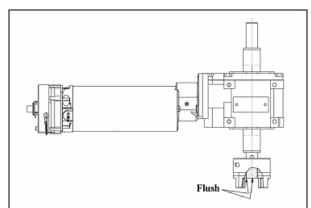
CLAMPING HUB POSITION ON GEARBOX SHAFT
